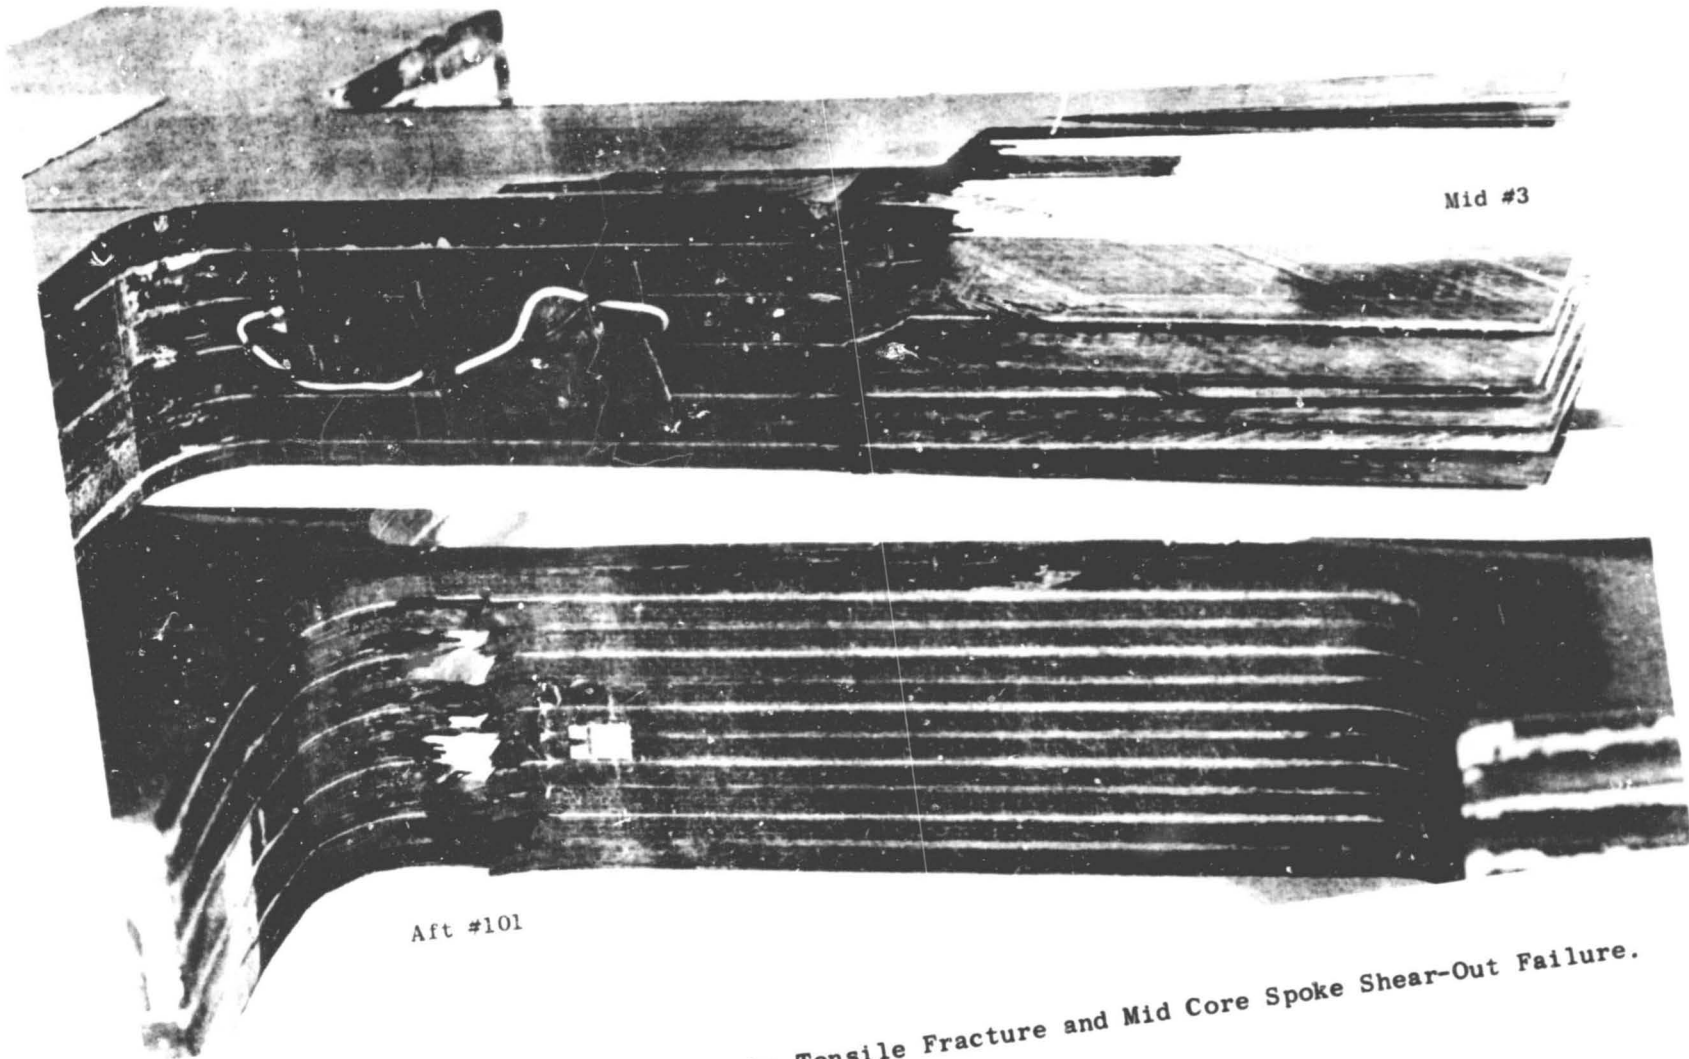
Closeup of Aft Core Spoke Tensile Fracture and Mid Core Spoke Shear-Out Failure.
